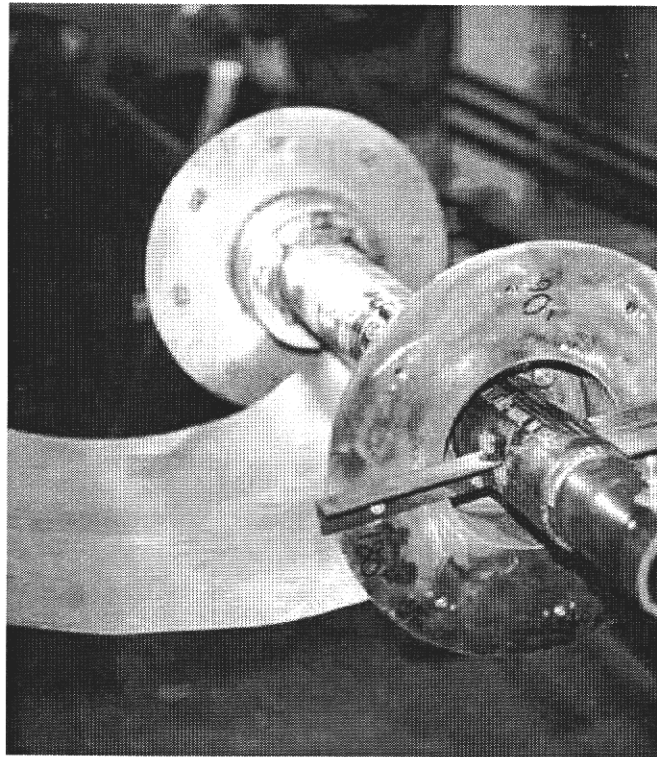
PMATP-CGOC1 Inner Containment Vessel.
